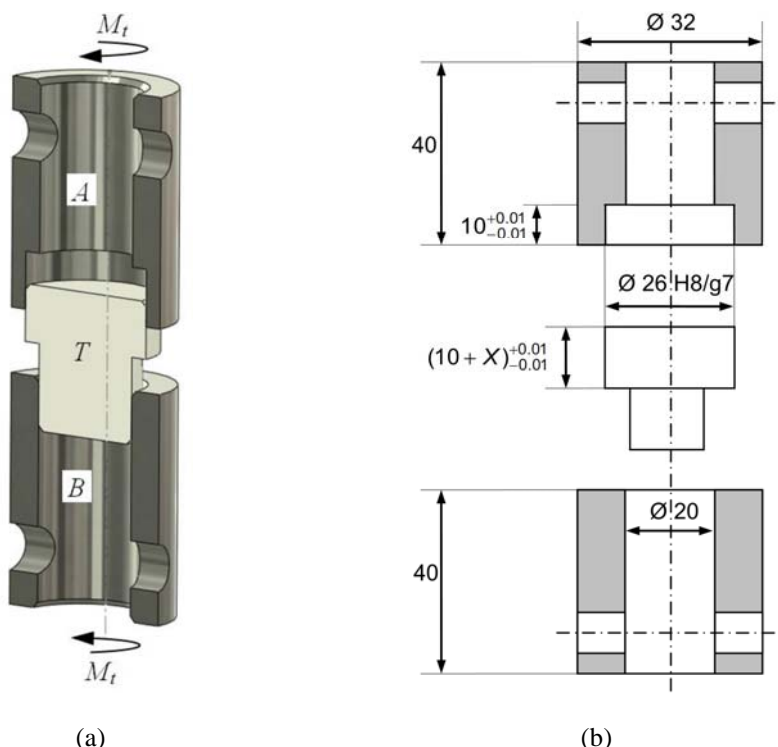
Exploded view (a) and technical drawing (b) of the proposed TBJ.
